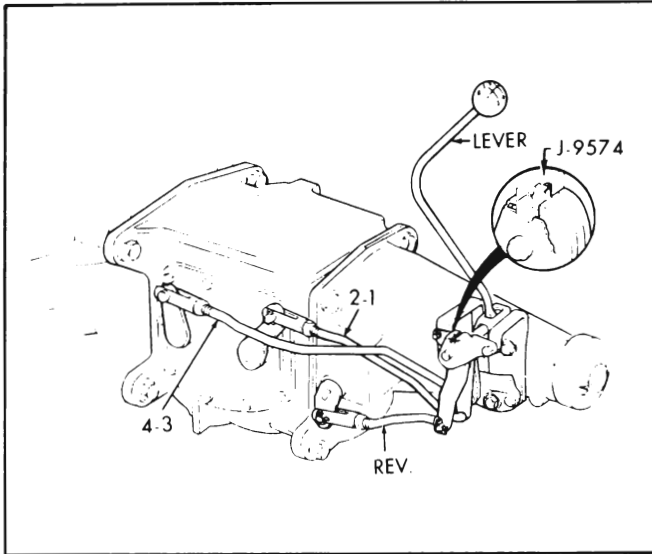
Four-Speed Transmission Gearshift Linkage
